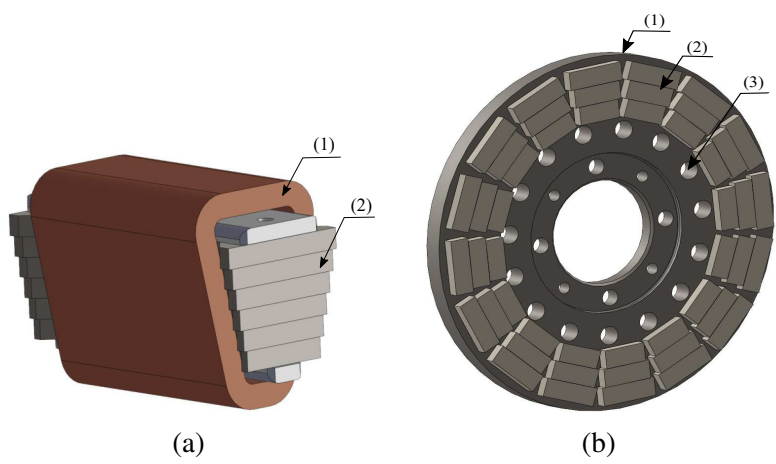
The YASA stator and rotor elements (a) stator coil construction: (1) winding, (2) core, (b) rotor construction: (1) rotor back-iron, (2) magnets, (3) ventilation holes.
